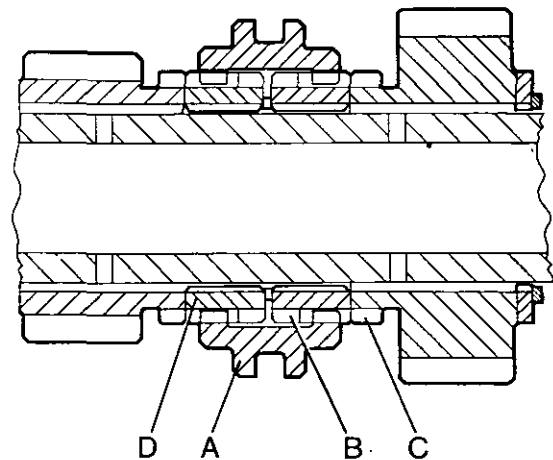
DOG CLUTCH ASSEMBLY (1410)
